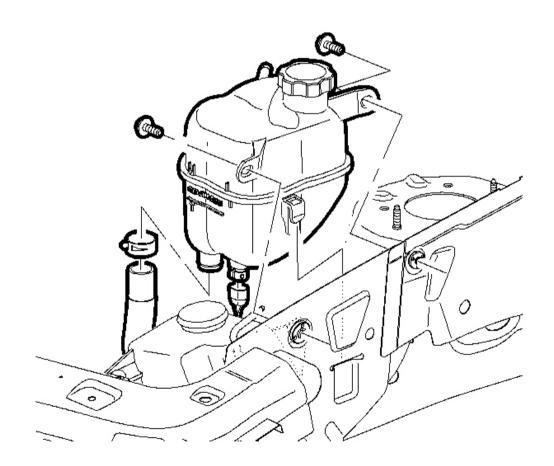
View Of Surge Tank Bolts Courtesy of GENERAL MOTORS CORP.
